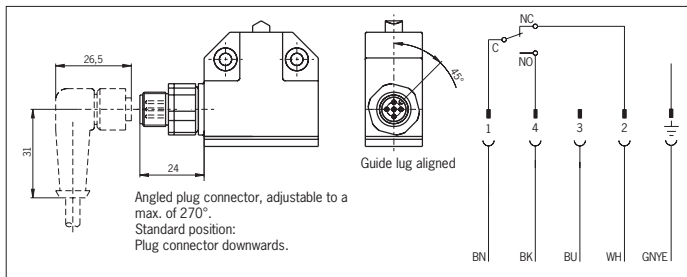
Dimension drawing/connection diagram N01.550SVM5 with plug connector M12 (SVM5, 5-pin)
